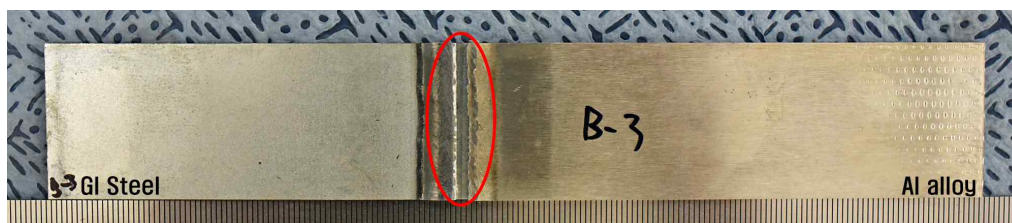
A Fractured Specimen of Shear-Tensile Test
